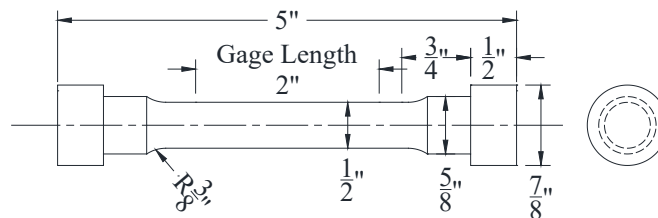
Tensile specimen geometry for all-weld-metal tension tests.
